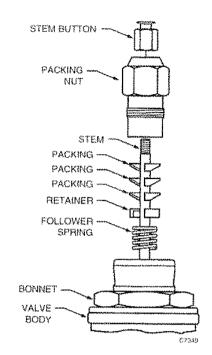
Valve with Cone Packing and 1/4 Inch Stem.
